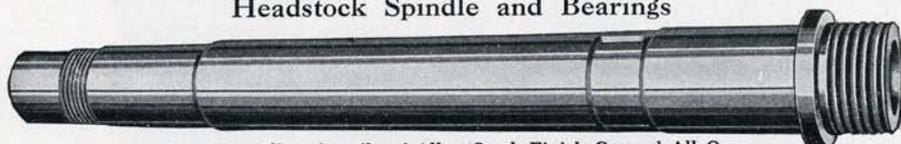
Hollow Spindle of Alloy Steel, Finish Ground All Over
